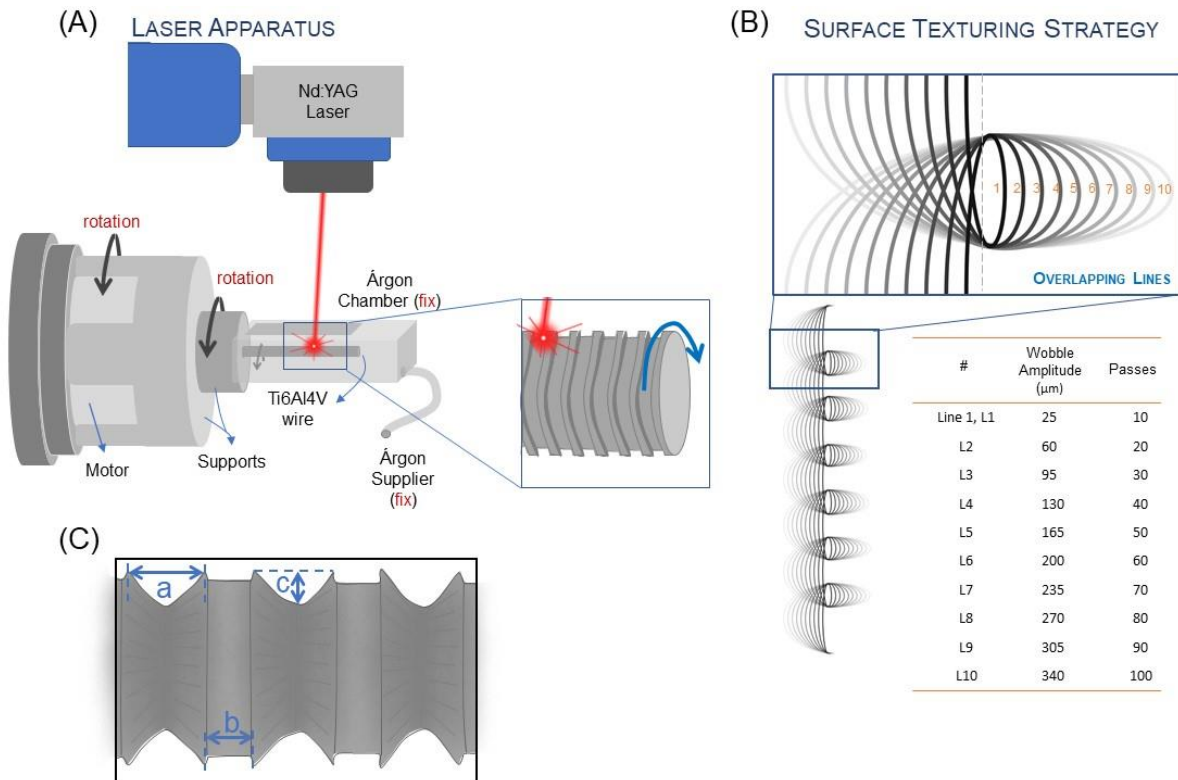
Schematic representation of A) laser machining apparatus, B) strategy for textures machining, and C) dimensions measurements (a=groove width, b=wall thickness, and c=groove depth).
